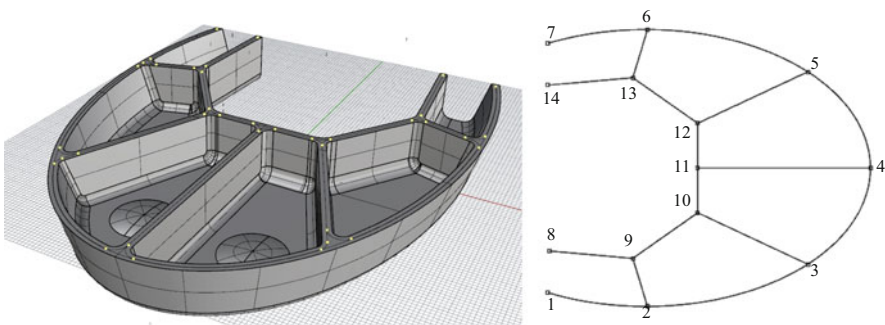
The workpiece to be produced with WAAM in 3D (left), and a single layer of it with 12 nodes and 17 segments (right)
